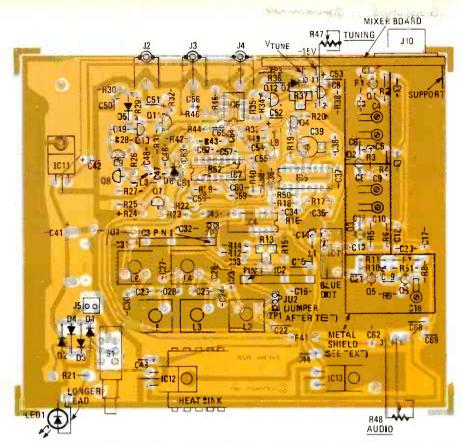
NOTE THAT IC1 AND IC2 are in SIF (Single In-line Package) packages. Pin-1 and is on left when package is viewed from side with markings.
